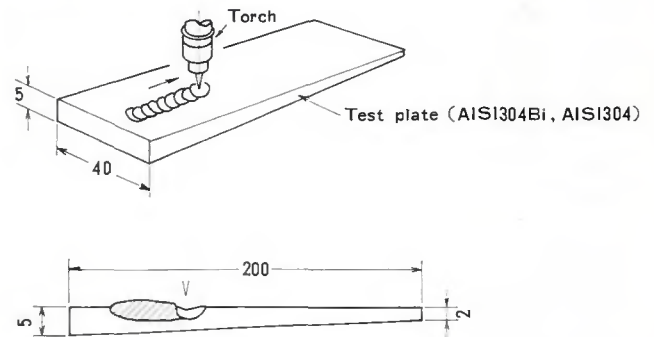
GTA procedure for weld pool surface tension measurement using tapered test specimen.
